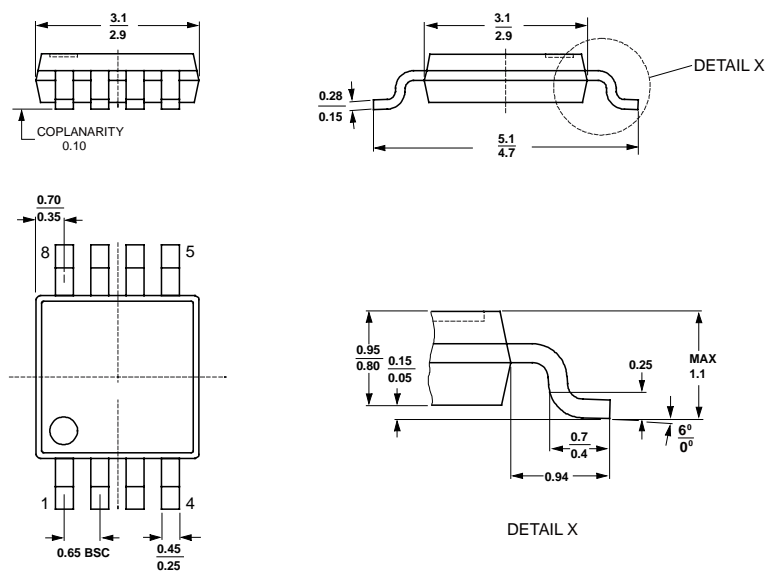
8-Lead MSOP Package Dimensions shown in millimeters
